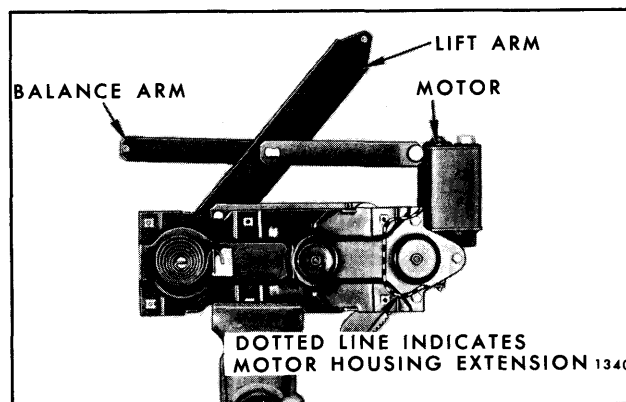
Door Window Regulator and Electric Motor Assembly
